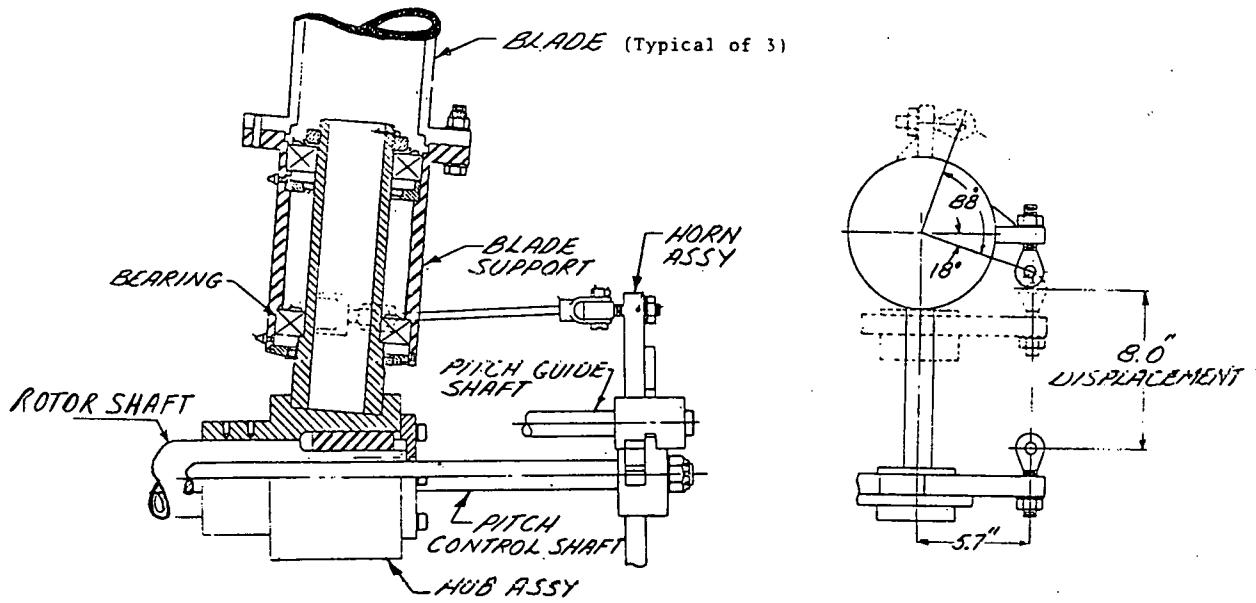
ROTOR, GENERAL ASSEMBLY
